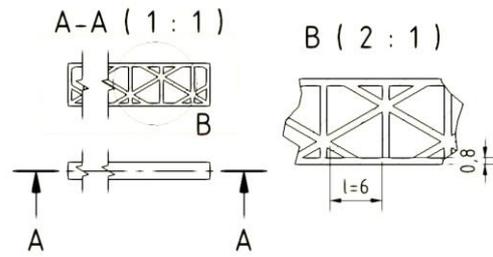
Specimen with triangle shape and 6 mm dimension of inner structure
